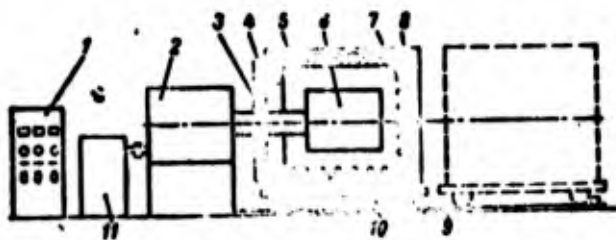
Diagram of brazing in a chamber furnace: 1 - cabinet of measuring equipment; 2 - loading device; 3 - packing; 4 - cover; 5 - casing; 6 - article to be brazed; 7 - heating elements; 8 - lining; 9 - rails; 10 - carriage; 11 - supply system of inert gas or the creation of vacuum.
